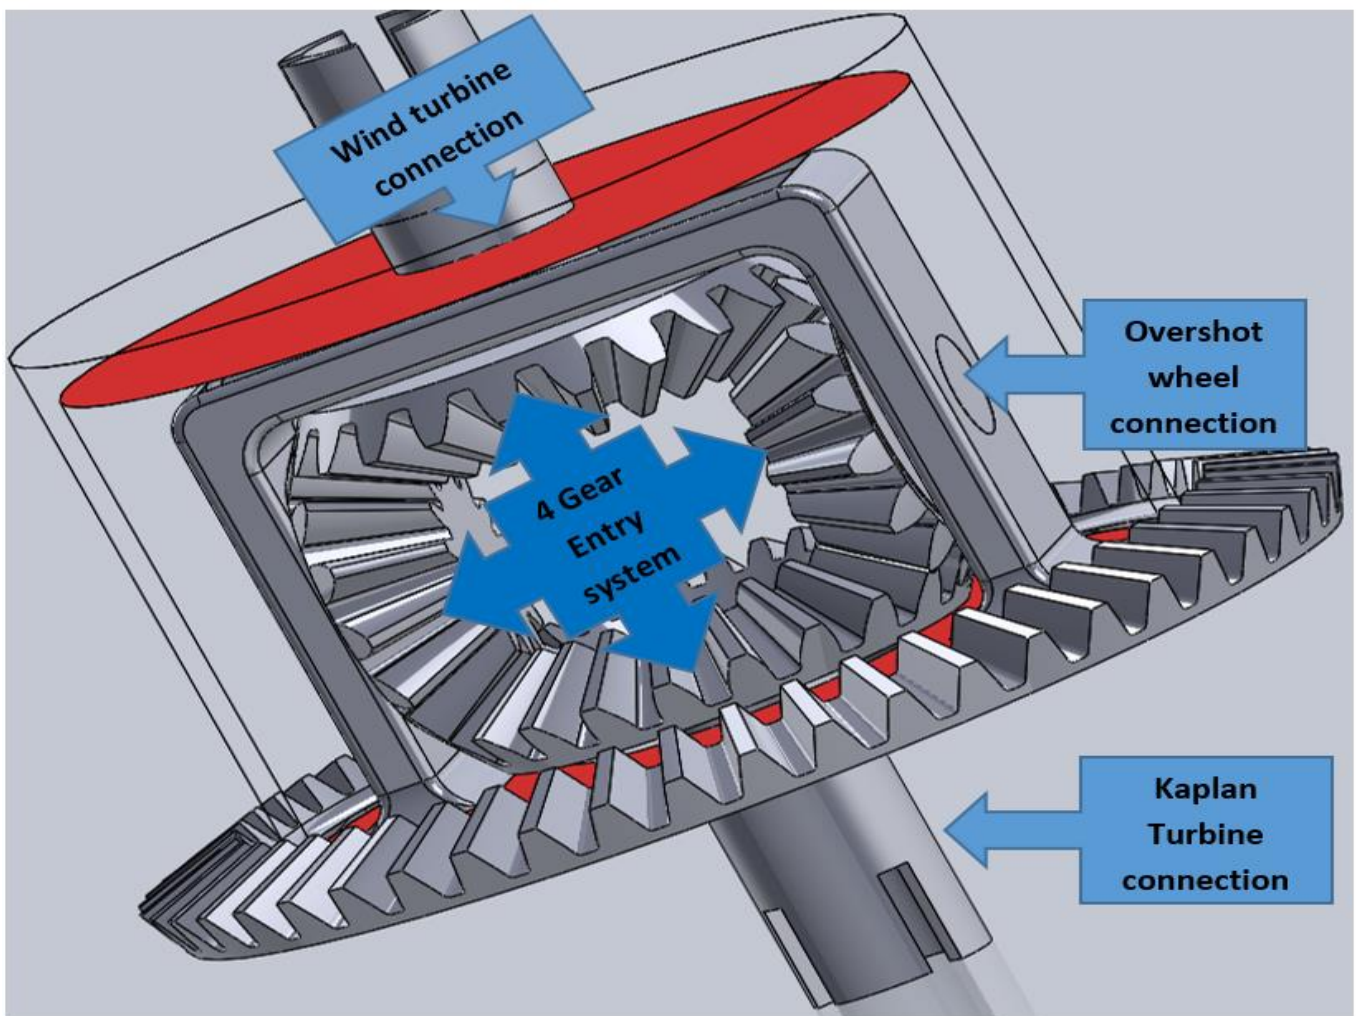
Bevel Gear systems fit for the 3D SRMPS
